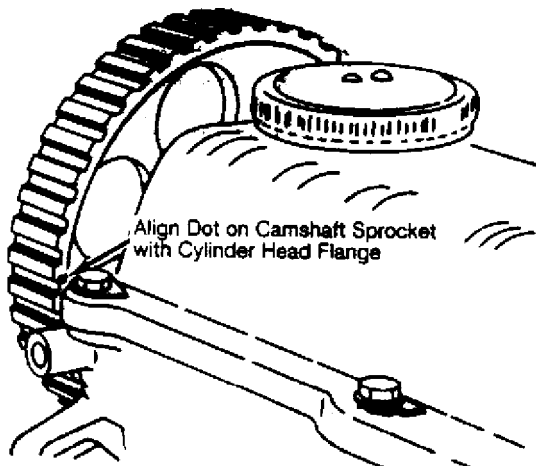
Camshaft Sprocket Positioning (Gasoline)
